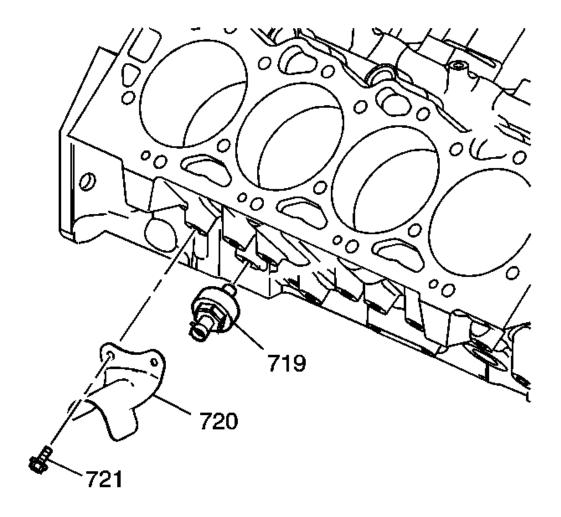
View Of Left Side Knock Sensor Courtesy of GENERAL MOTORS CORP.
